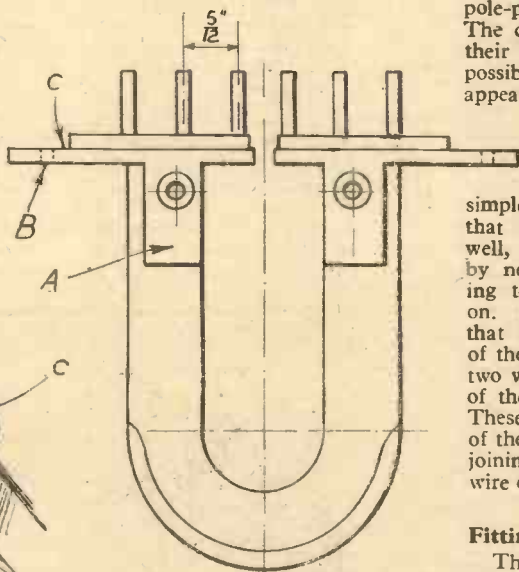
The magnetic unit for the six-string guitar. The additional pole-pieces are assembled and then bolted to the magnet.
